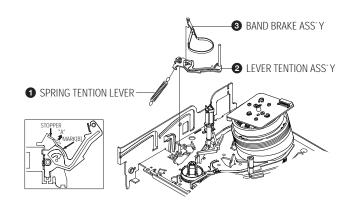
Lever Tension Ass'y, Band Brake Ass'y Removal
